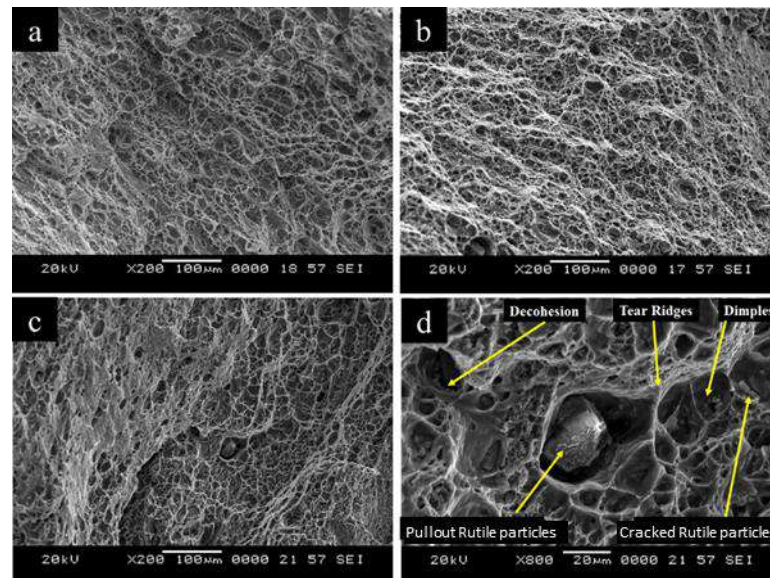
SEM image of a fractured surface of AA6061-3 (wt%) Rutile composite joints friction stir welded using CSTC tool (along the weld direction) at a constant rotational speed of 1000rpm and a) welding speed of 60 mm/min, b) welding speed of 75 mm/min, c) welding speed of 90 mm/min, and d) higher magnification image showing the dimples, pullout, decohesion, and cracked rutile particles.
